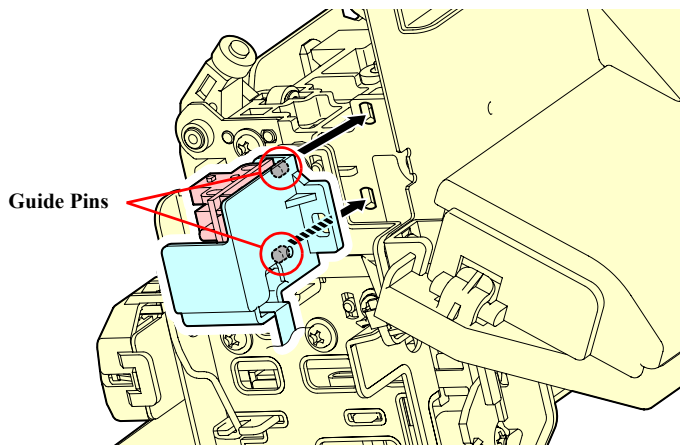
Reinstalling the CR ENCODER HOLDER
